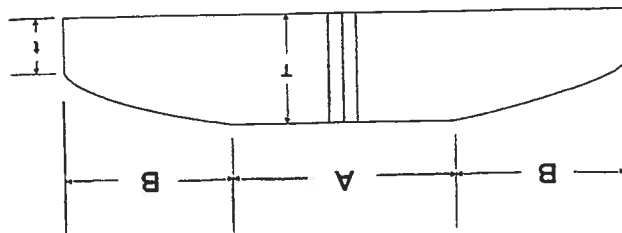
Tubular Impact Specimen Containing Original OD Surface
